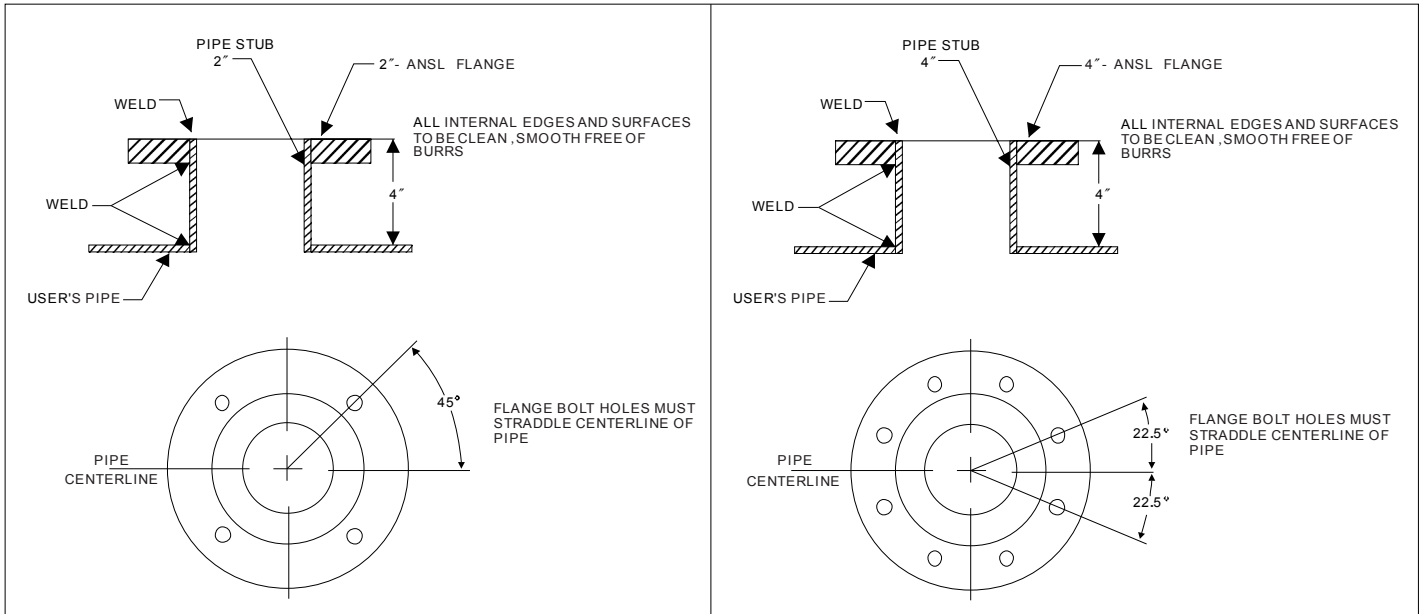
Configuration between Short Connecting Tube and Flange Bolt Hole
